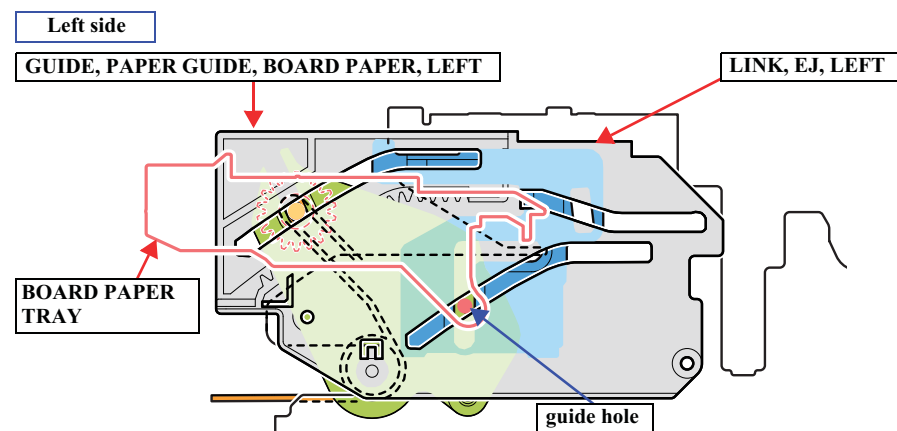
Guide holes of the LINK, EJ, LEFT and GUIDE, PAPER GUIDE, BOARD PAPER, LEFT
